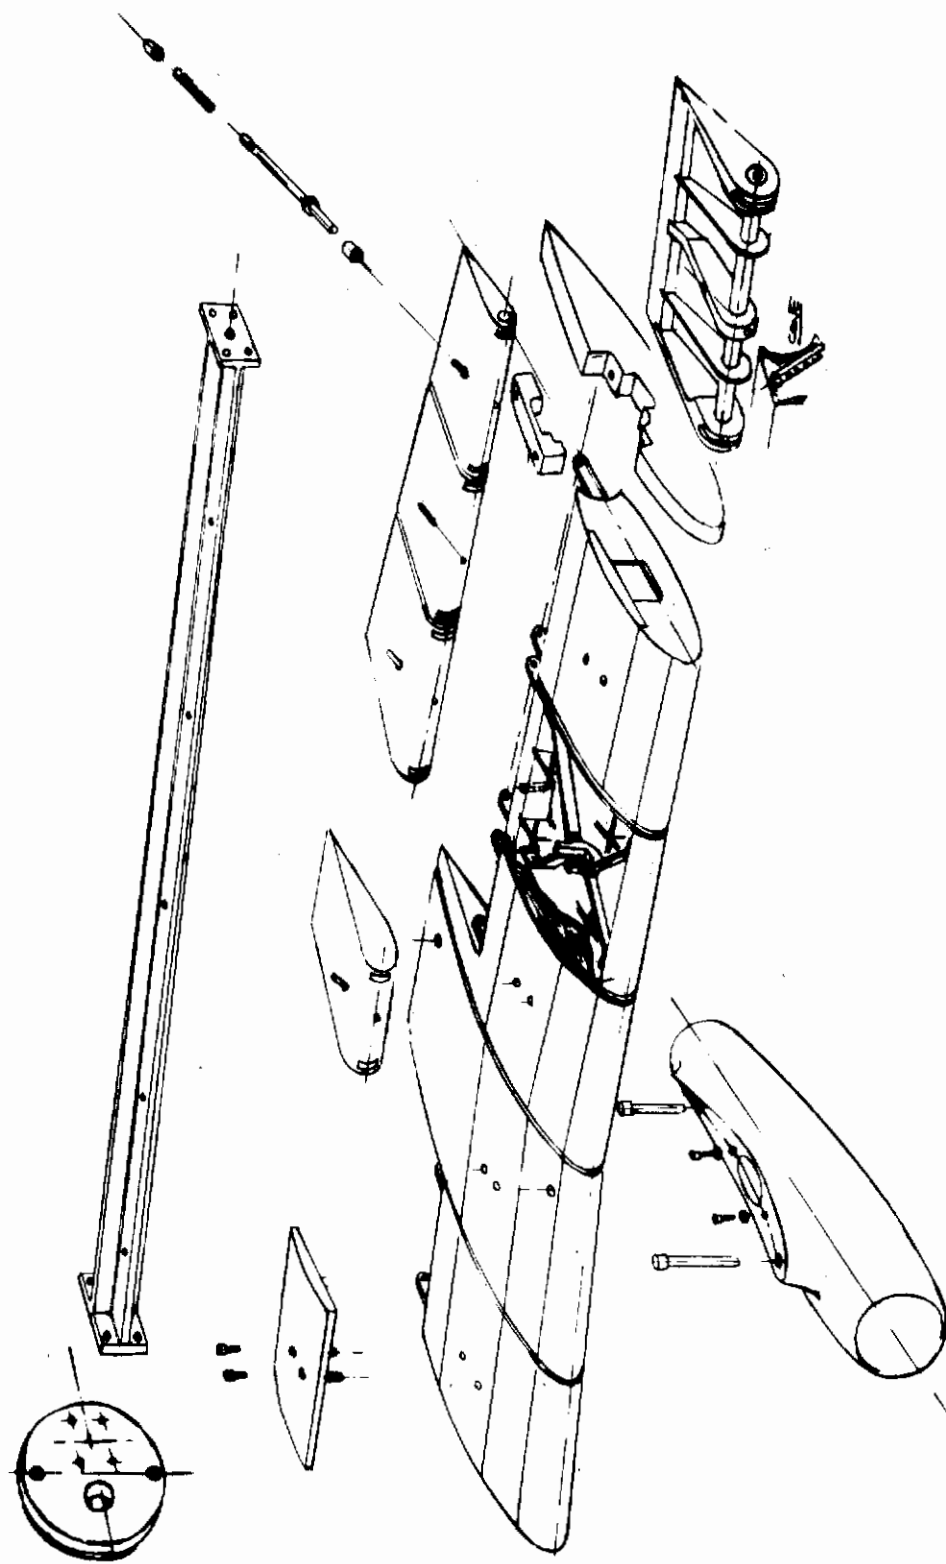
WING CONSTRUCTION DETAILS
